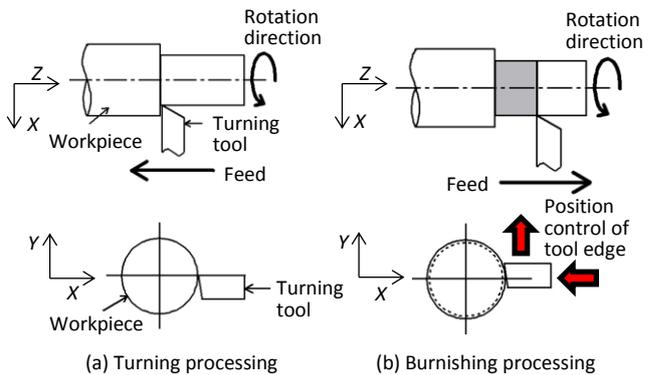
Schematic of burnishing processing method utilizing a flank face of tool nose
